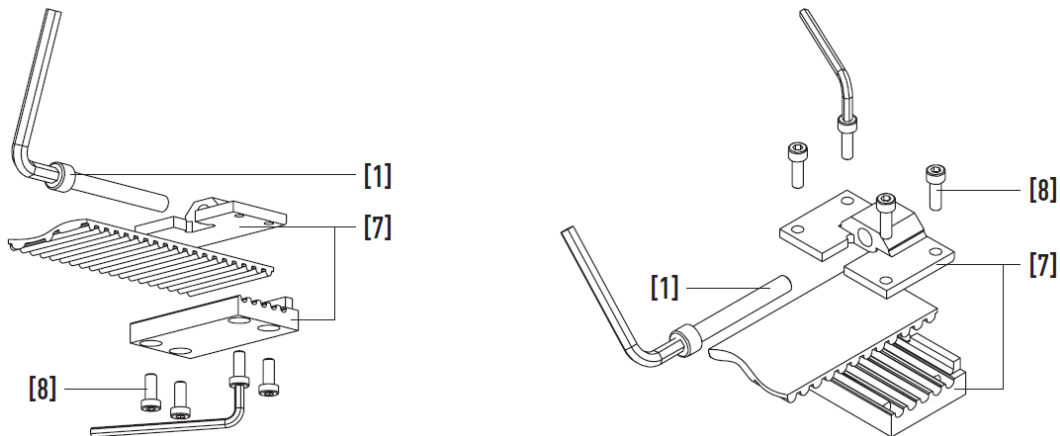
Releasing the toothed belt from the belt tensioner (HT100B)
